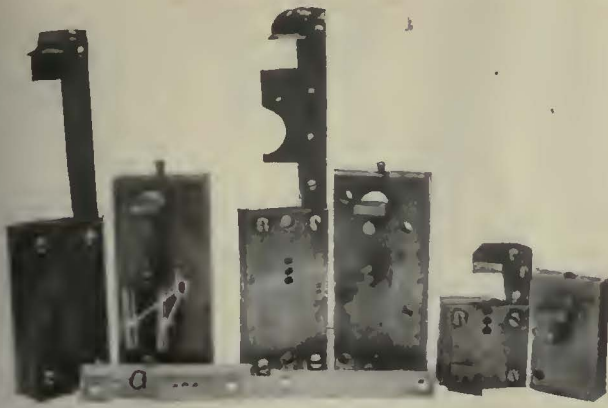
Several Types of Forming and Punching Dies Are Used for Making the Various Parts of Controller Fingers
